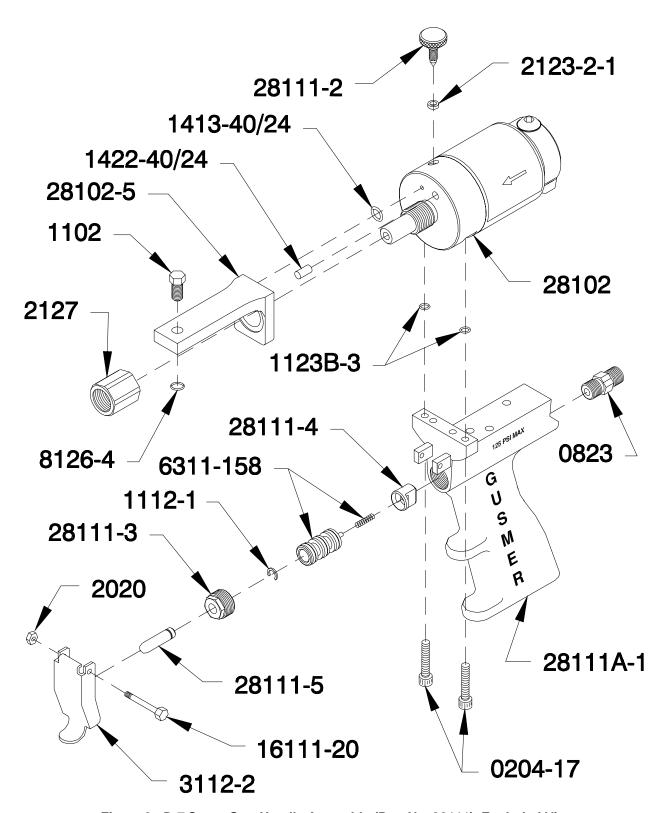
D-7 Spray Gun Handle Assembly (Part No. 28111), Exploded View
